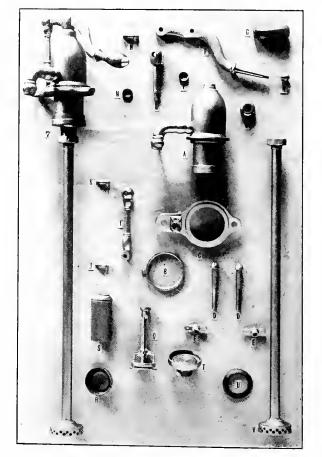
Washroom Pump and Fittings. Howard & Company.
